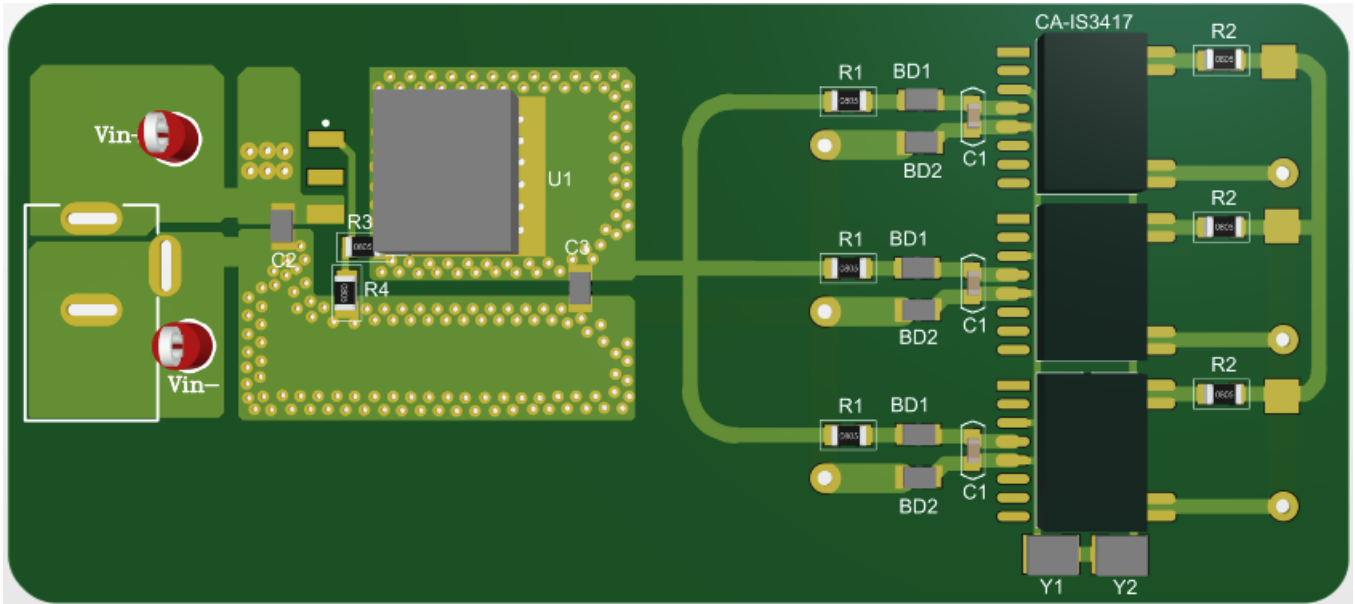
CA-IS3417WT-Q1 reference design board(2-layer)
